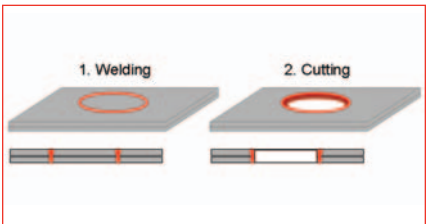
Cutting a sealed aperture along a previously welded circular overlap joint through two sheets.
